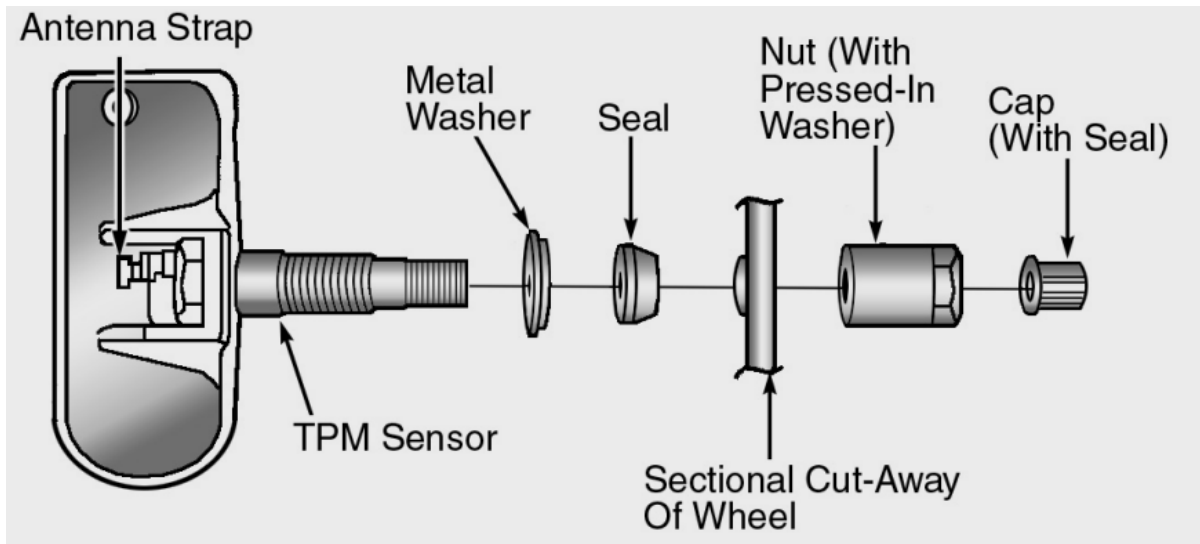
Identifying Tire Pressure Sensor Components (SRT8)
